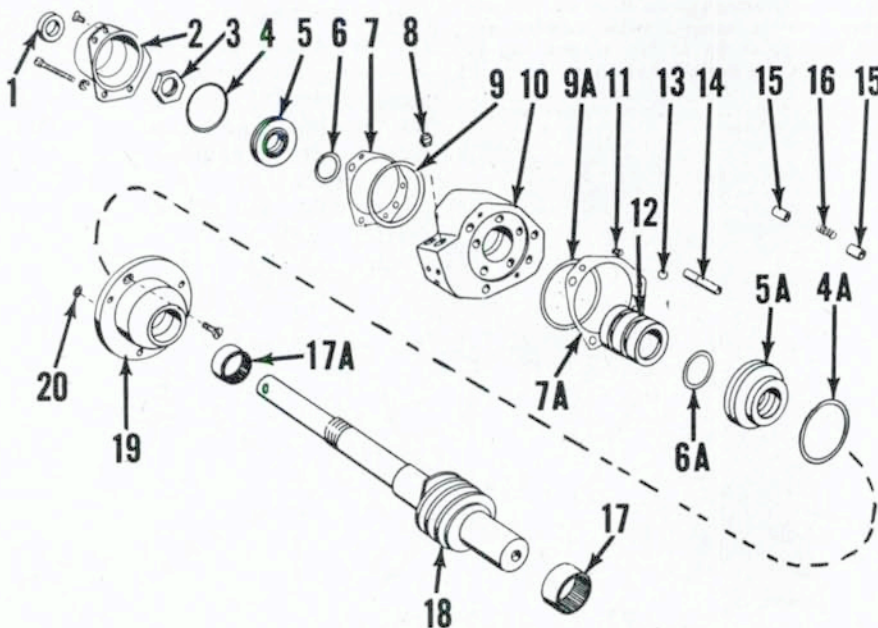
Exploded view of power steering control valve unit. Later production unit is shown; early production valves may be overhauled as described in text using later parts shown above.
